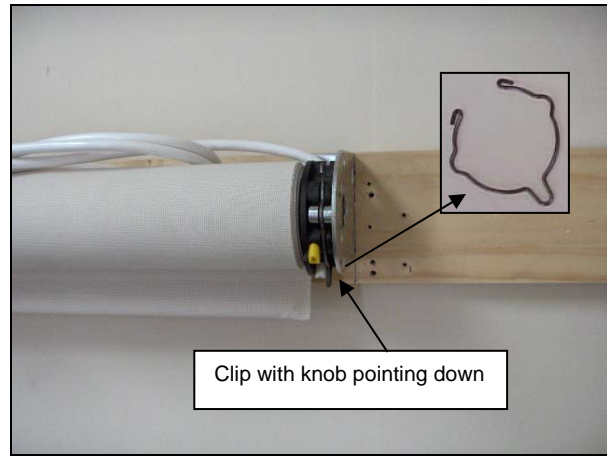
Motor in Bracket with Motor Retaining Clip in Place
